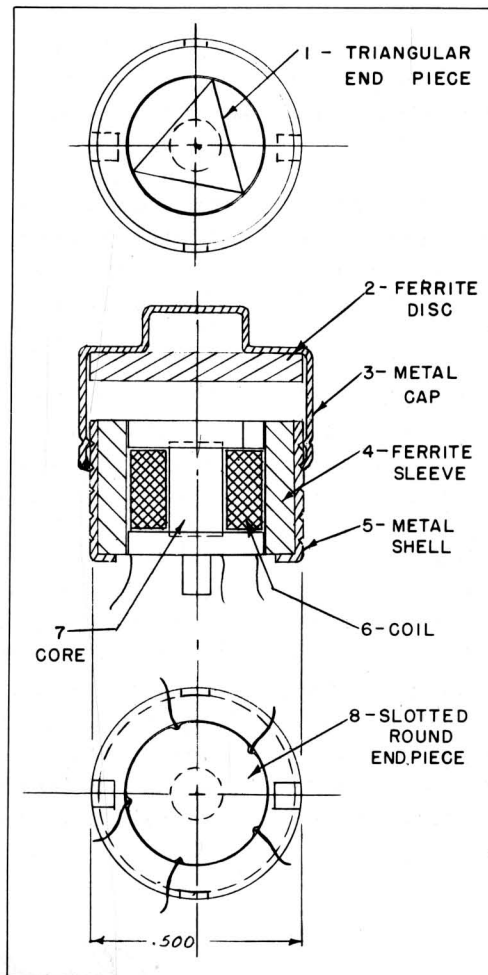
Cross-sectional view of bobbin-type i-f transformer assembly.
